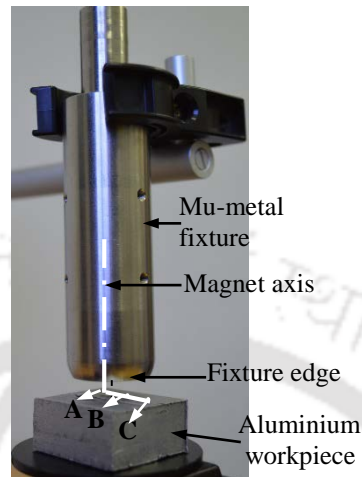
Magnet holder along with aluminium workpiece showing magnetic field measurement positions
